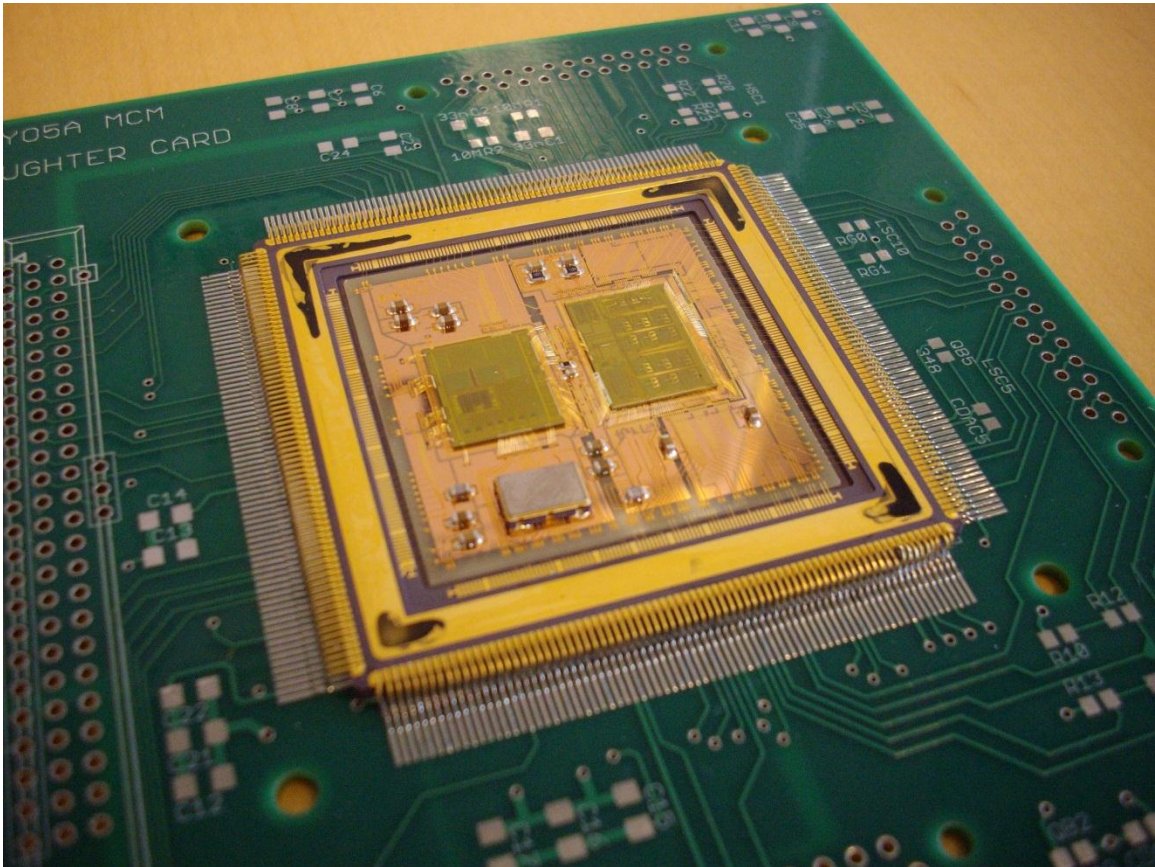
A photograph of an assembled MCM REU attached to a PCB with the lid removed
